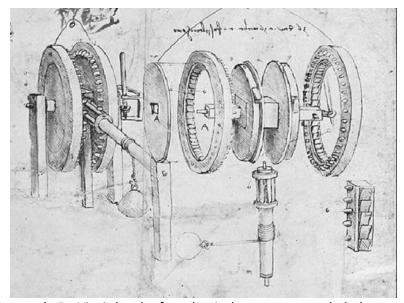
Leonardo Da Vinci sketch of mechanical gears as an exploded assembly view
